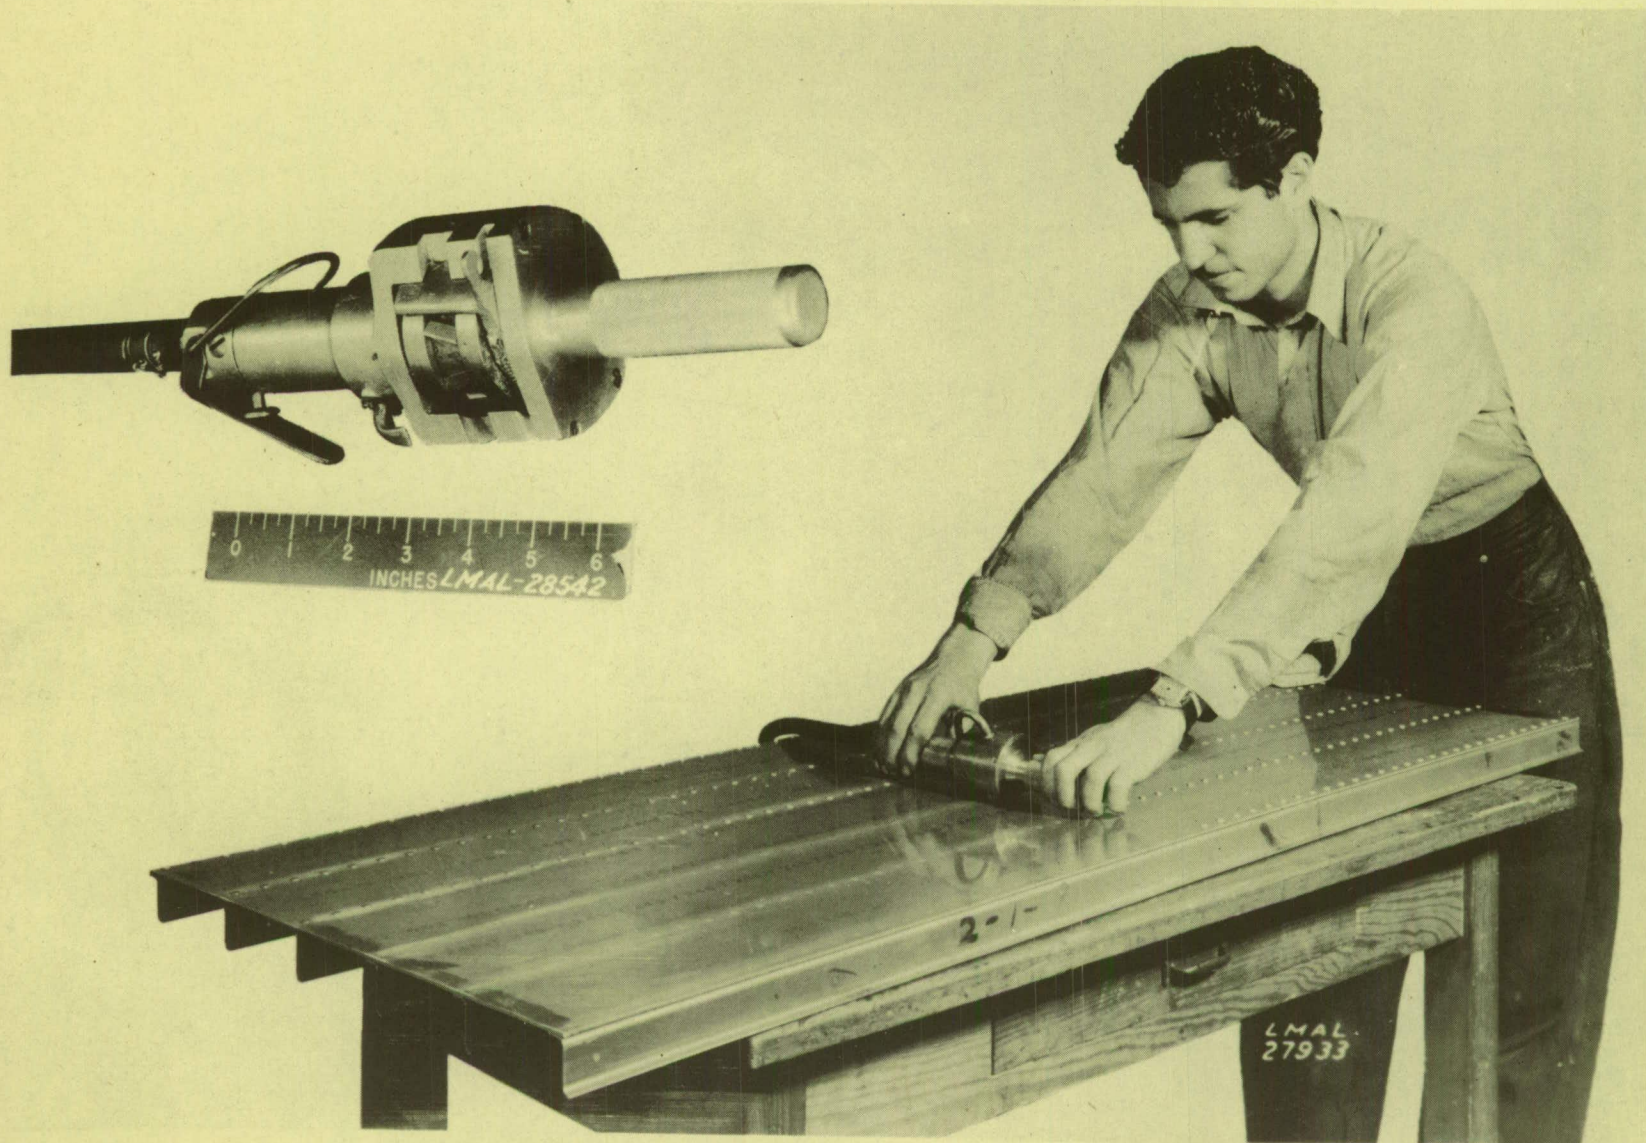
Flush-rivet milling tool for removing the protruding portion of the rivet head.
